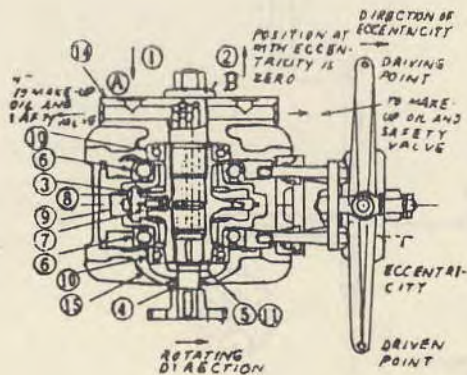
Sectional view of Hele Shaw pump assembly
